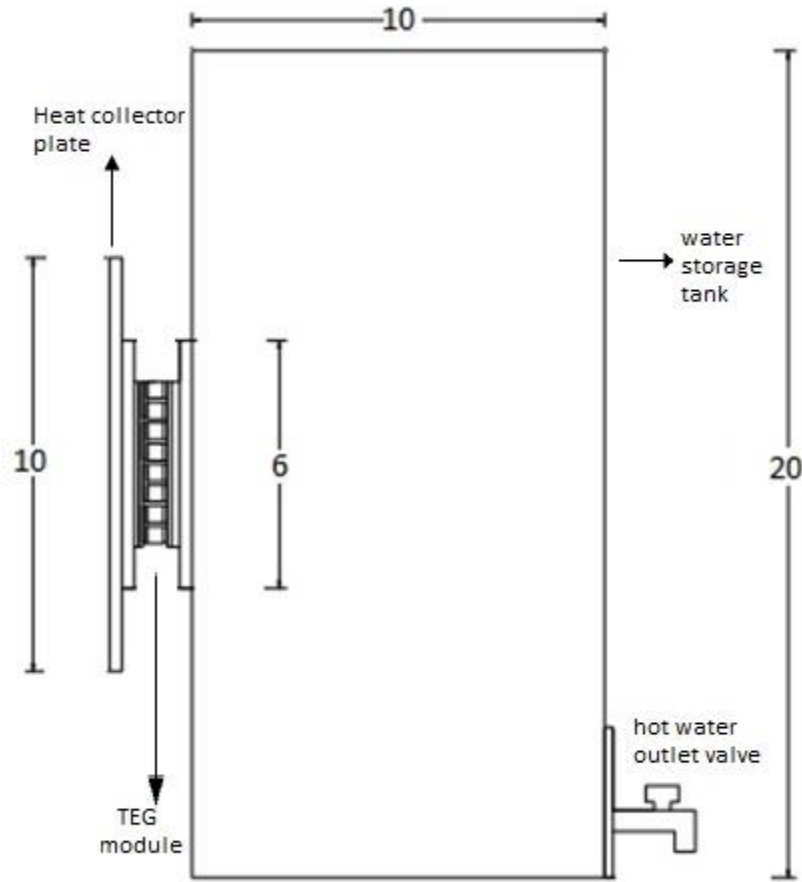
Side view of TEG assembly (all dimension are in cm)
